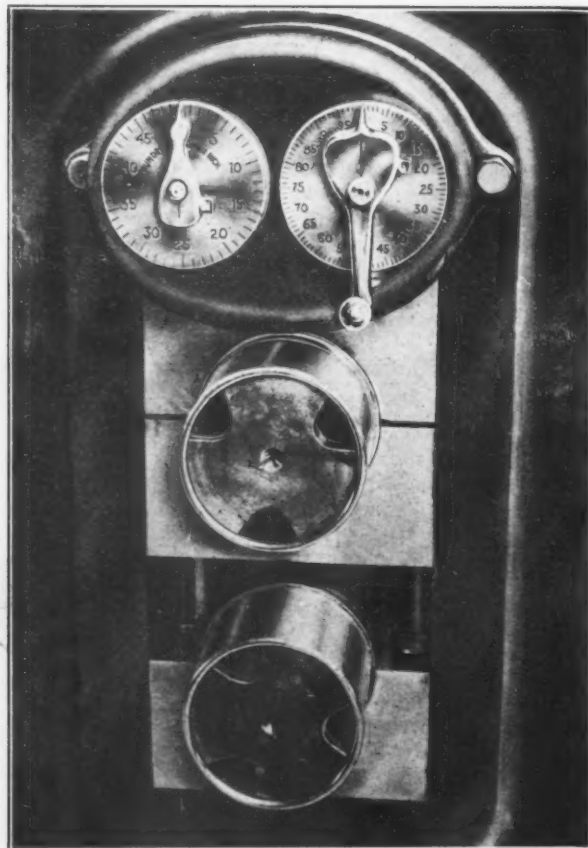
Detail of the Roll Ends, Showing the Dials Indicating to 0.0001 in. the Thickness Rolled.
